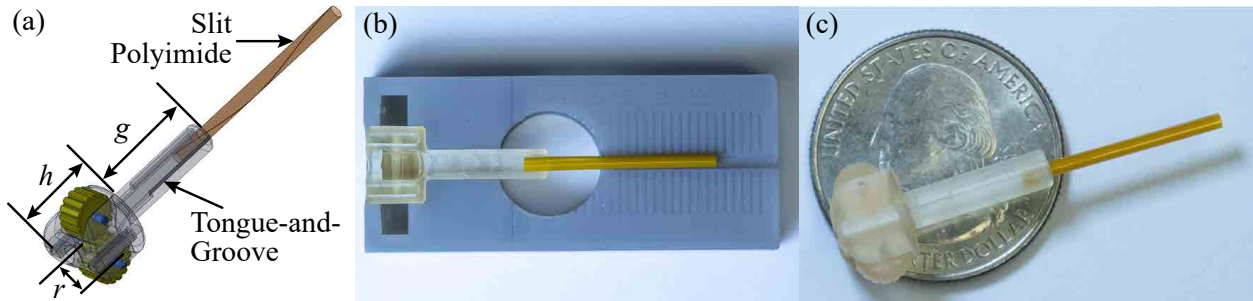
Manual roller insertion tool (a) transparent CAD design showing paired entry chambers which slide together via a tongue-and-groove mechanism, (b) half of tool in assembly jig facilitating length sizing and adhesion of the slit polyimide sheath, and (c) assembled tool in comparison to a United States quarter dollar (diameter of 24.3 mm)
